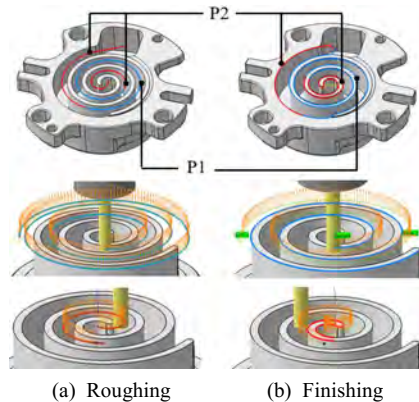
Orbit scroll machining area division considering cutting resistance analysis
